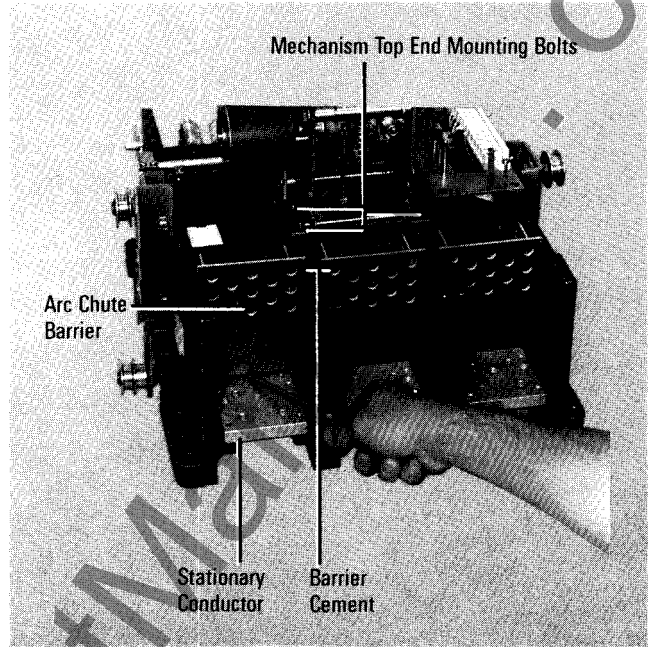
Removing Arc Chute Barrier From 1600 Amp Breaker.
